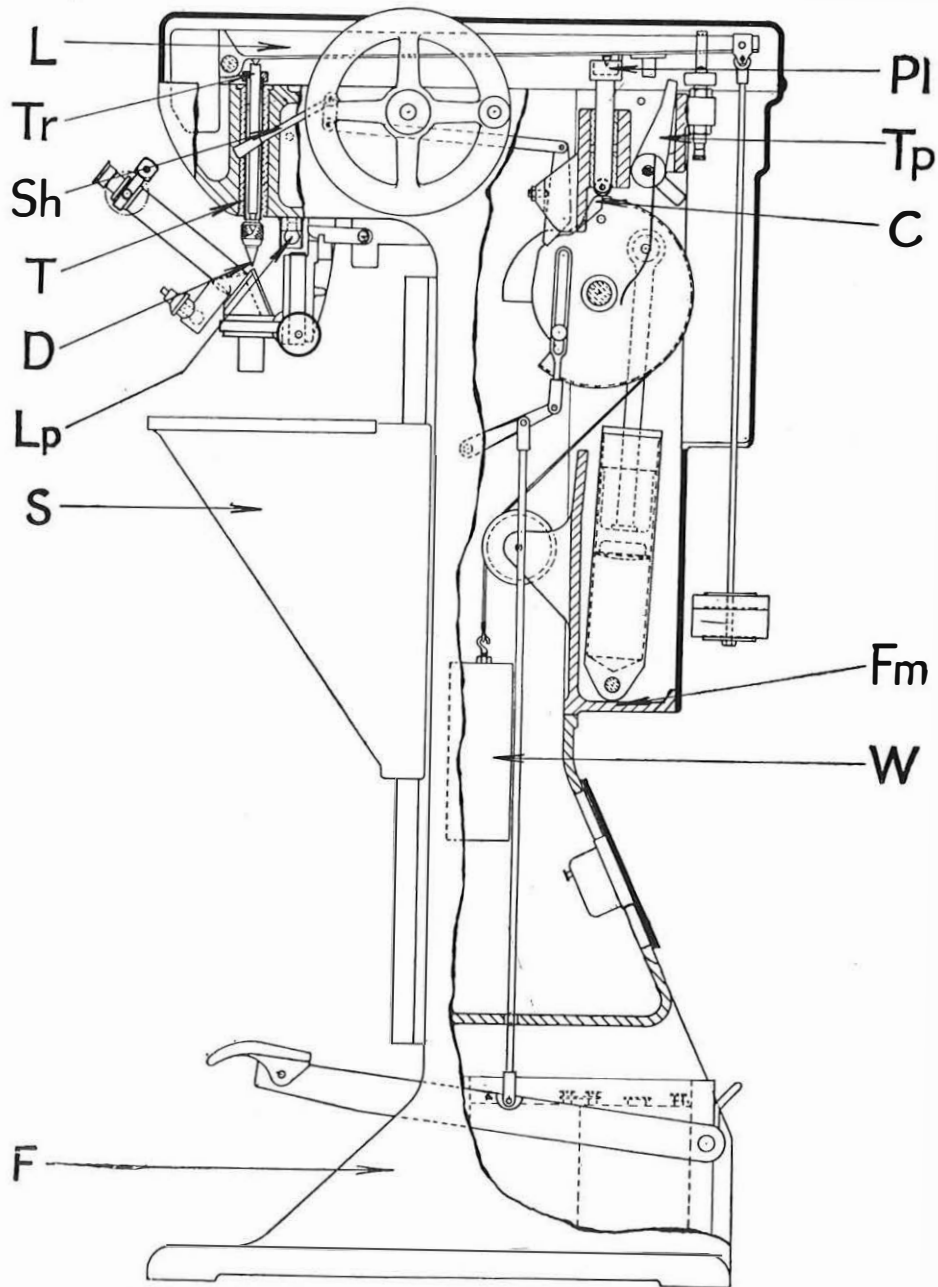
DIAGRAM OF VICKERS HARDNESS TESTING MACHINE.
